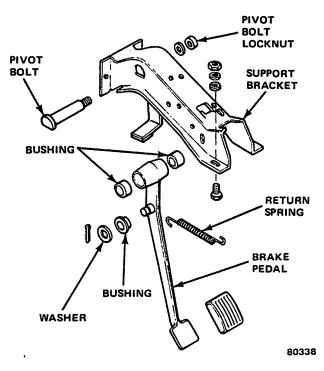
G-1 Brake Pedal-CJ and Scrambler Models
